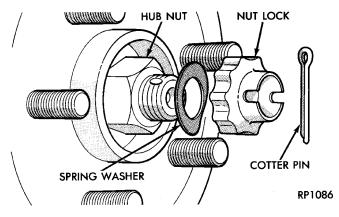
Spring Washer, Nut Lock, And New Cotter
